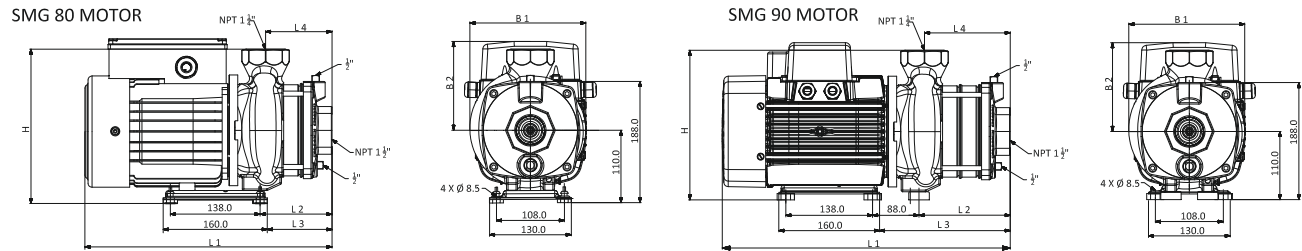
Dimensional sketches, SH, SHI, SHN-8
